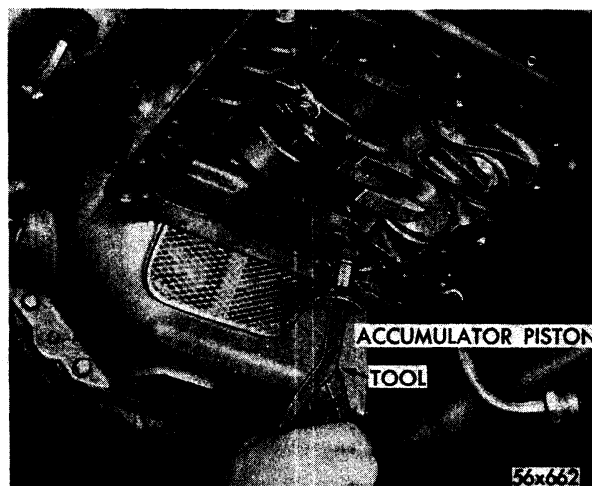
Removal and Installation of Accumulator Piston (Typical View)
